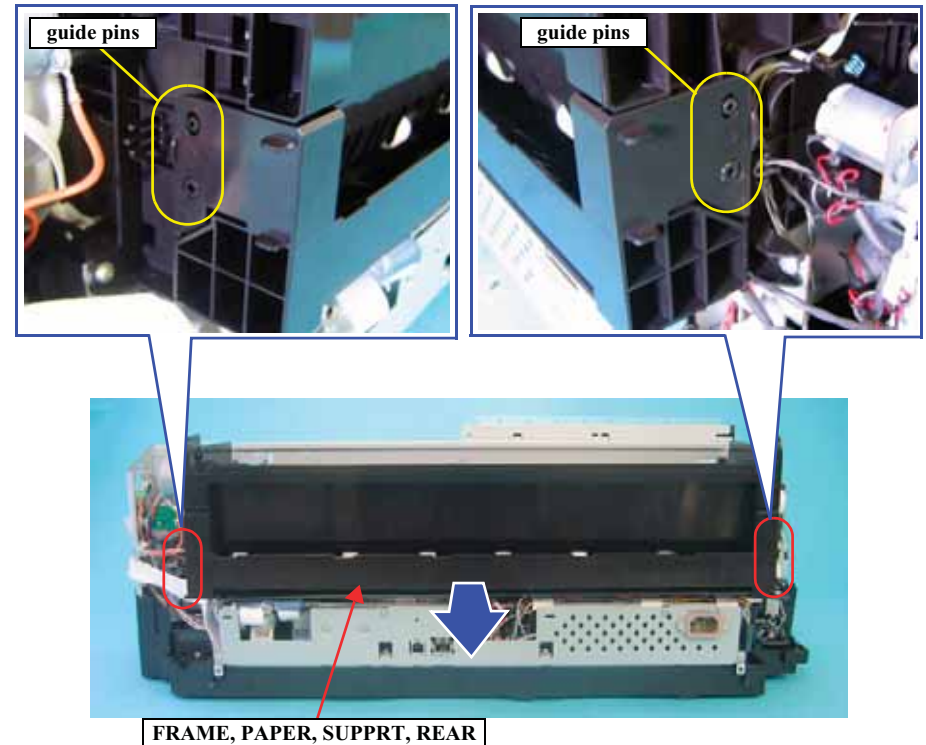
Removing the FRAME, PAPER, SUPPORT, REAR
